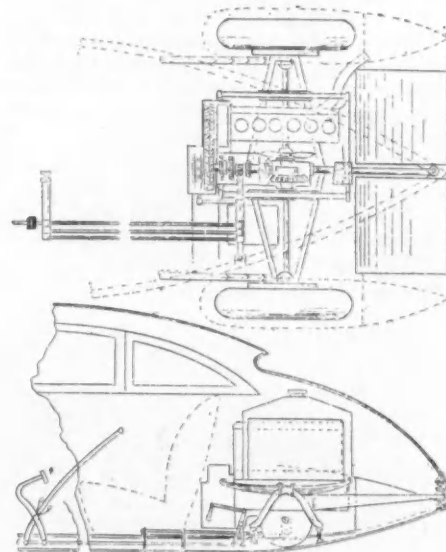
SUGGESTED MOUNTING AND TRANSMISSION DESIGN FOR ENGINE AT REAR
